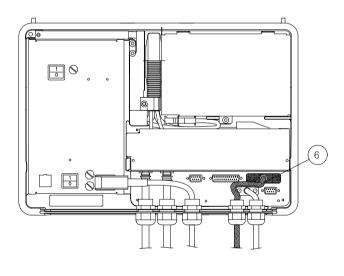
Connecting the FE modem connection cable RS232, TSRA 904 63, (Pos 6).
